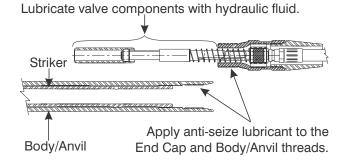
Prepare Body/Anvil and Tail Assembly for Assembly.
